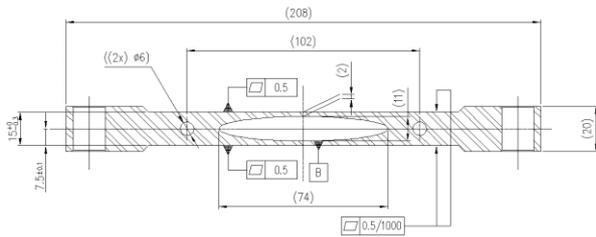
15 mm, extruded-aluminium vacuum chamber.
